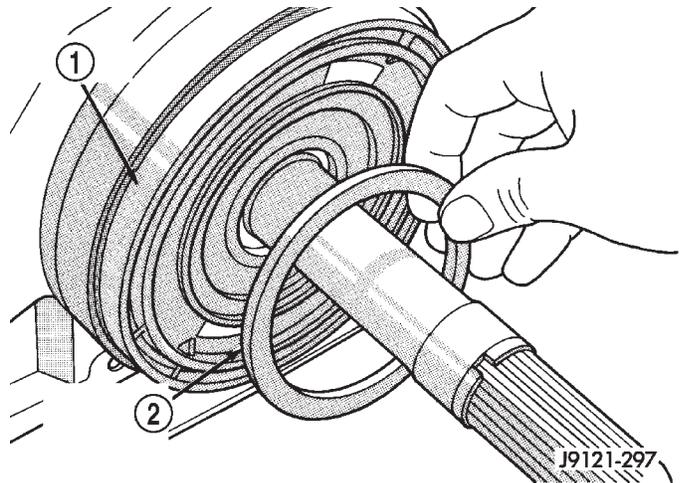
Overdrive Piston Thrust Bearing Removal/Installation
